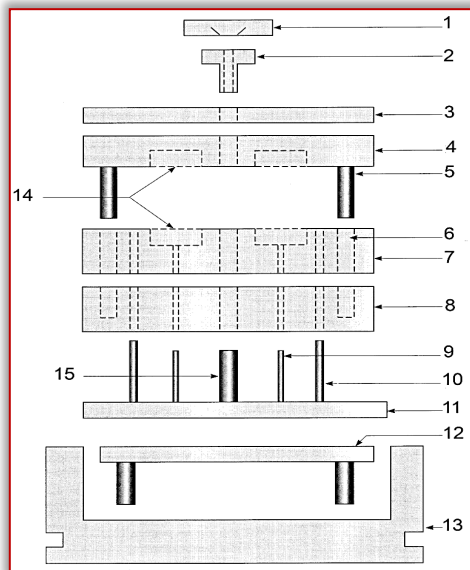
Elements of plastic injection moulding tool;/; 1 – Nozzle centring sleeve 2 – Sprue bushing 3 – Plate 4 – Fixed mould 5 – Guide pin 6 – Guide bushing 7 – Movable mould 8 – Support plate 9 – Ejector 10 – Ejector return rod 11 – Ejector backing plate 12 – Ejector drive plate 13 – Ejector housing 14 – Mould cavity 15 – Extractor
